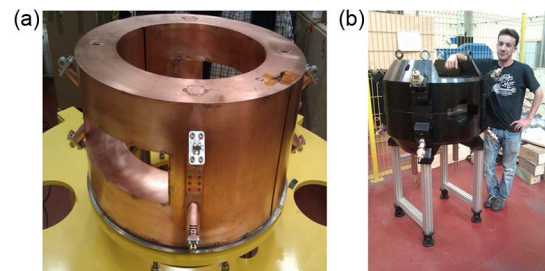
Magnet manufacturing. (a) Thermal shield assembled around the casing and (b) quality measurements during cryostat assembly.
